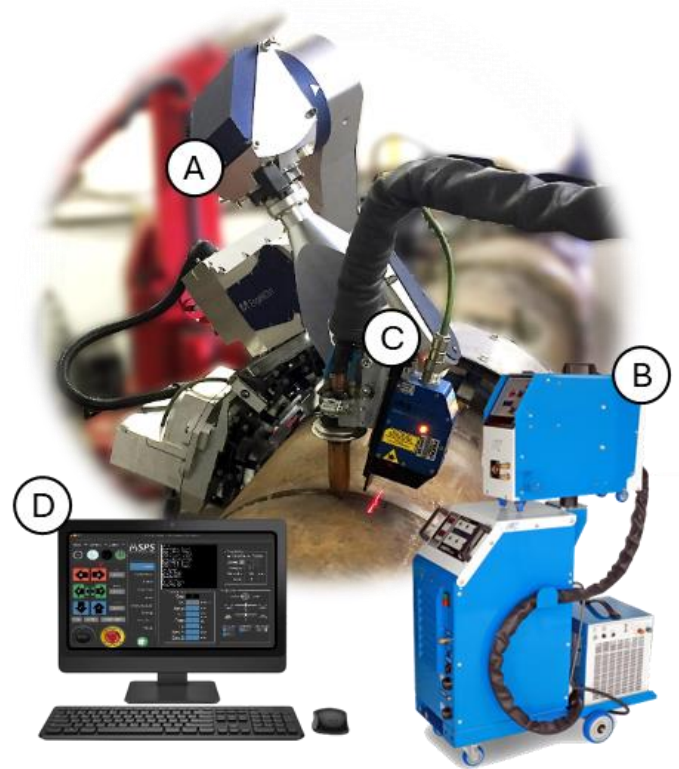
SCHEMATIC SETUP OF THE ADAPTIVE WELDING SYSTEM, WHERE: A) ENGEMOVI RES 7 4 780T 7-AXIS ROBOT ON RAIL; B) IMC A7 DIGIPLUS WELDING POWER SOURCE; C) METAVISION SLS V1 LASER SENSOR; D) AWP;
